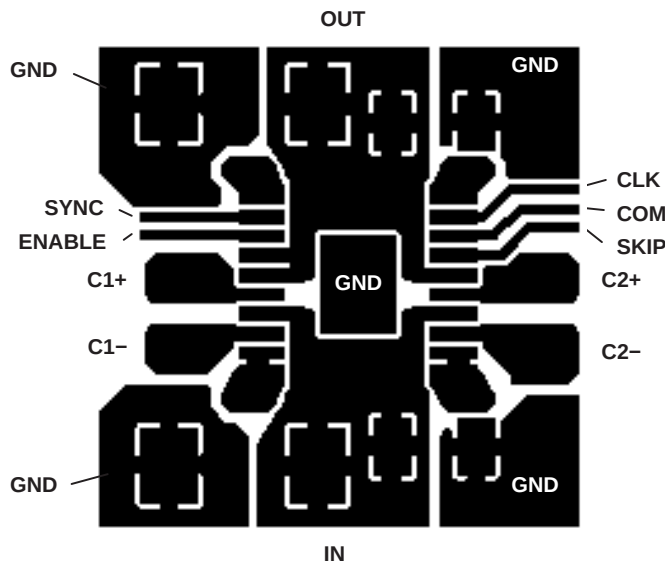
Recommended PCB Layout for TPS60111 (top view)
